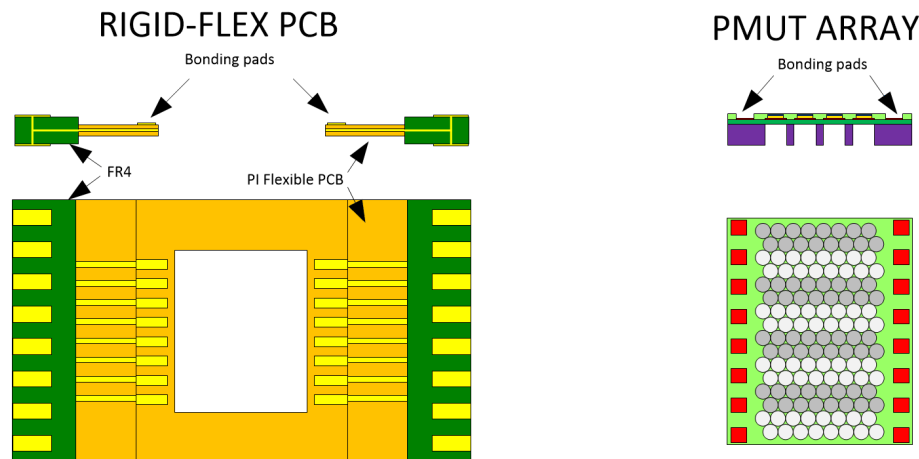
Simplified schematic top and cross-section views of the PMUT array die (right) and of the rigid-flex PCB (left): the PCB has a central PI part including aperture to hosts the PMUT array, and two lateral FR4 boards to connect the array to external boards.
